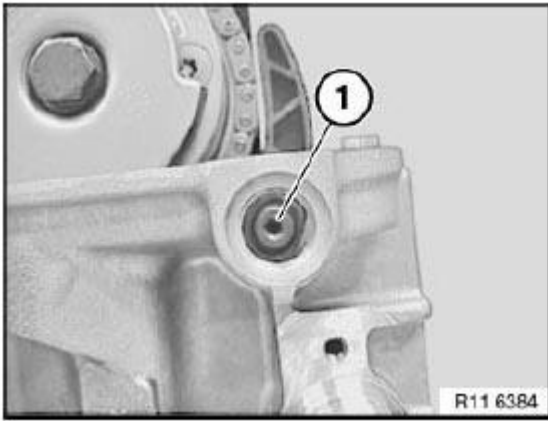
Identifying Bearing Pin From Timing Chain Module On Cylinder Head
